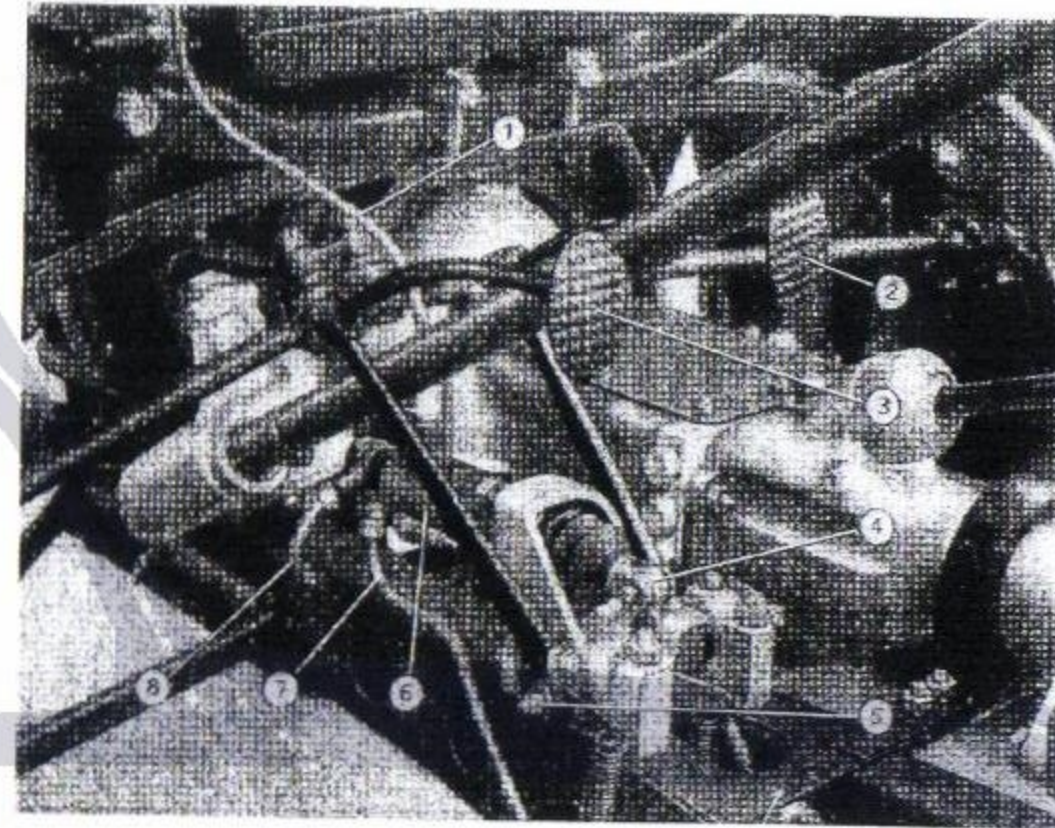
Pedals and hydraulic brakes master cylinder.
